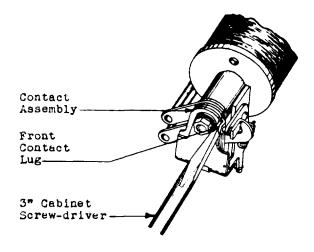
Adjusting for Contact Separation by Adjusting Front Contact Lug to Right
